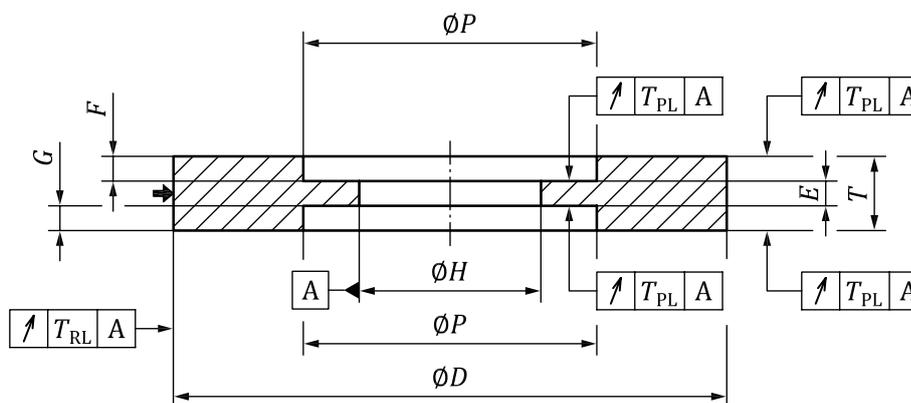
Grinding wheel, recessed on both sides (Type 7)
